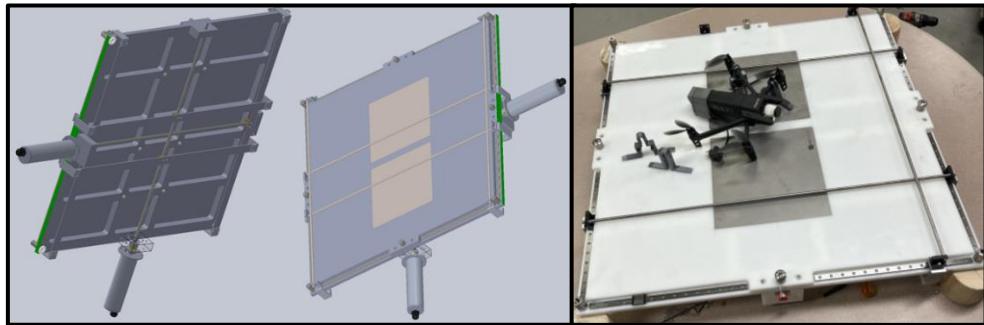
Wireless charging platform SolidWorks model (left) built out assembly (right)
